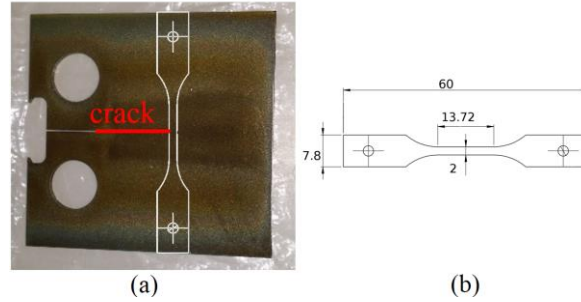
Preliminary machining of pre-cracked CT sample (a) before performing the final EDM of the SENT (b)
